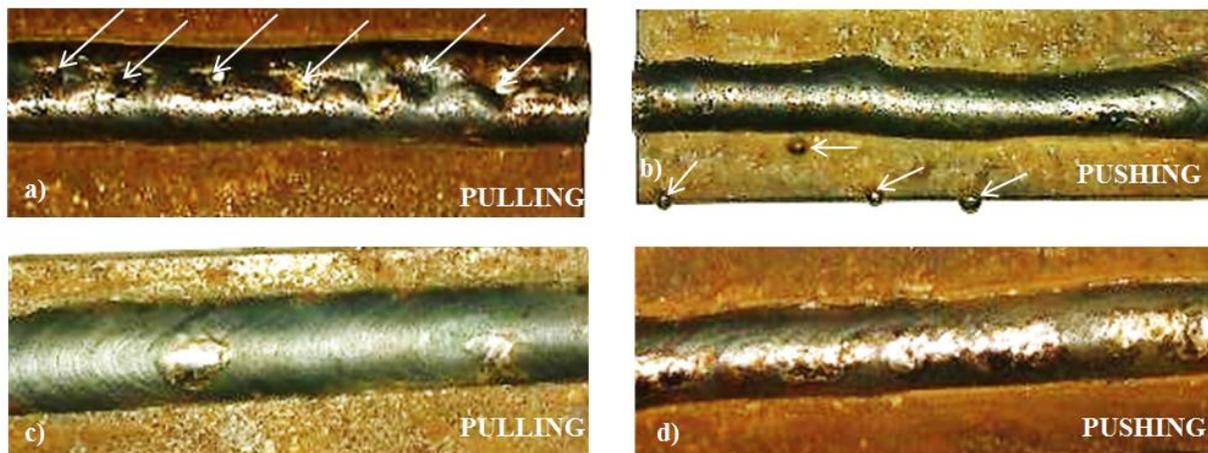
Weld Bead (a) CW-GMAW pulling, (b) CW-GMAW pushing, (c) EW-GMAW pulling and (d) EW-GMAW pushing
